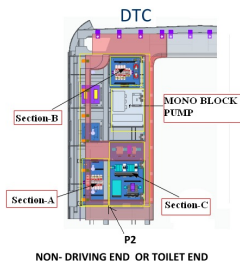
Panel P2 Equipment Details of DTC Coach
